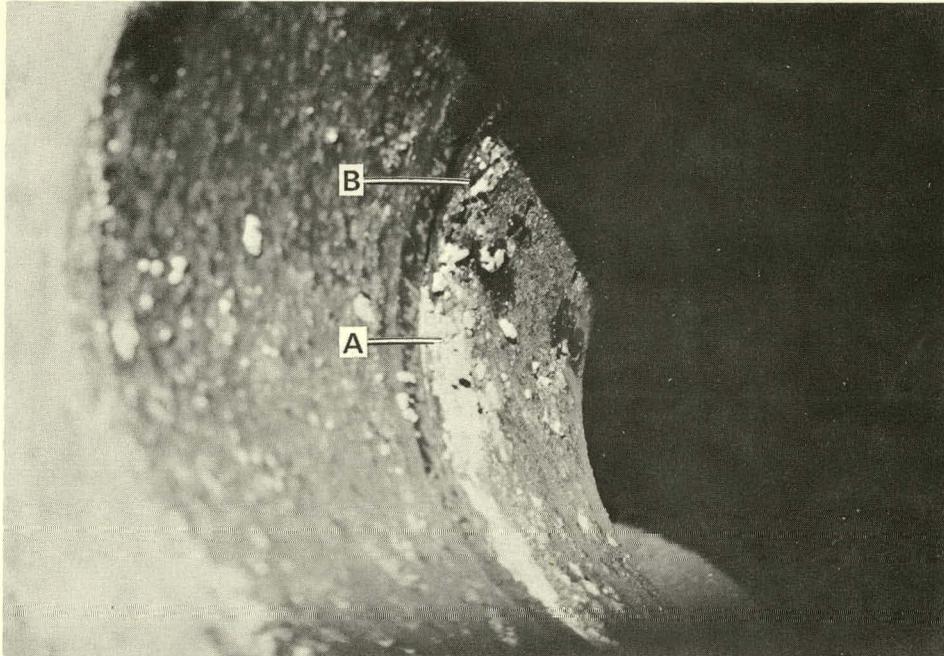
Close-up Appearance of Inlet Pipe on Heat-removal Condenser Water Box Showing (A) Corrosion Products and (B) Pitting
